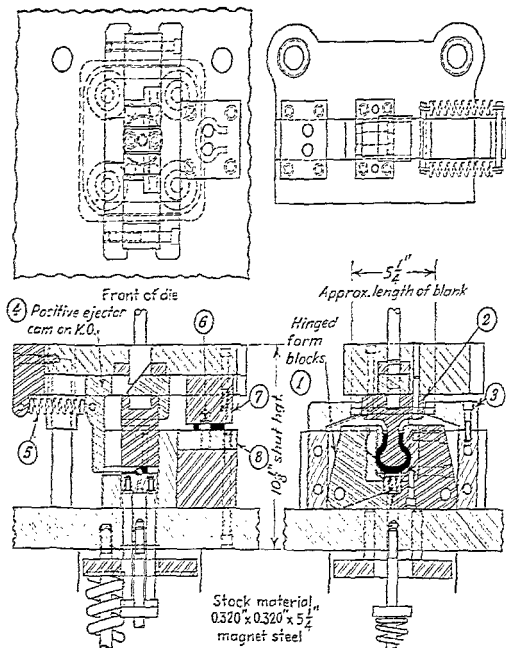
Forming and flattening die. (Harig Mfg. Corp.)
